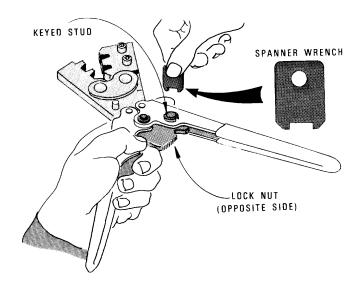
CRIMPING TOOLS (MOLEX) (Sheet 3 of 3)
